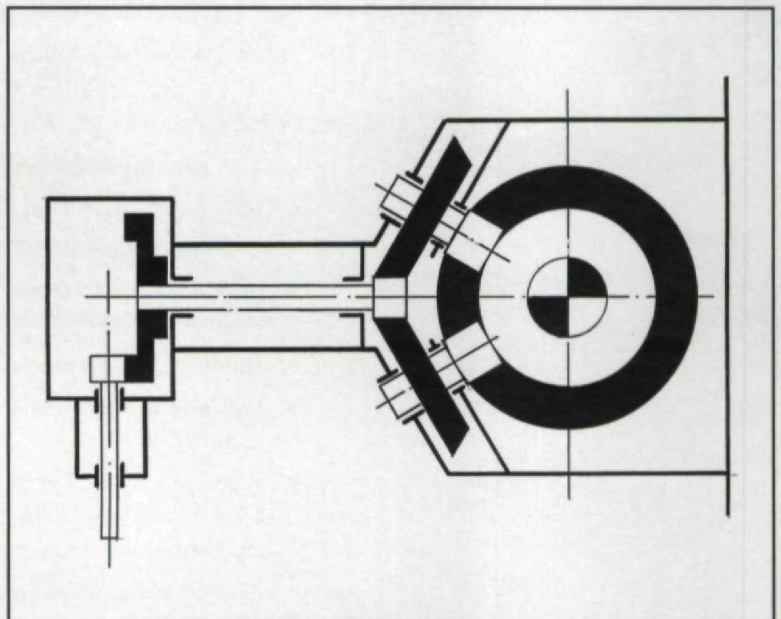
Helicopter gear assemblies. (Patented by Daf SP.)
